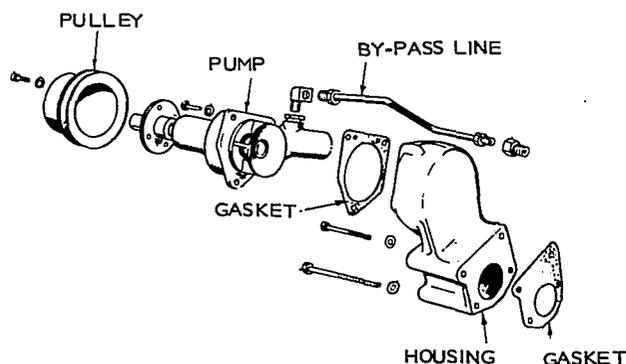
WATER PUMP—EXPLODED VIEW
